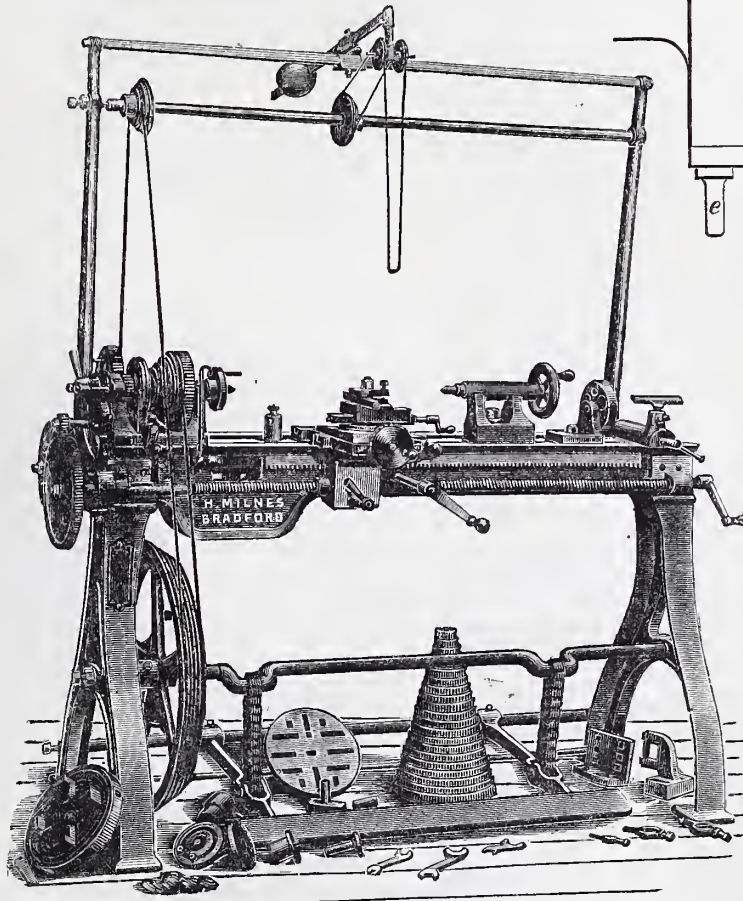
Milnes' Self-Acting Slide and Screw-Cutting Lathe for Foot Power.
